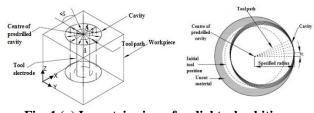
(a) Isometric view of radial tool orbiting (b) Top view of radial tool orbiting in EDM process
